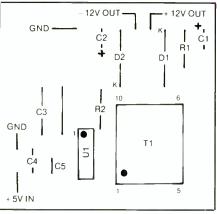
Wiring guide for pc board. Use this as a rough guide to component placement if you wire the circuitry on perforated board and use point-to-point wiring.
